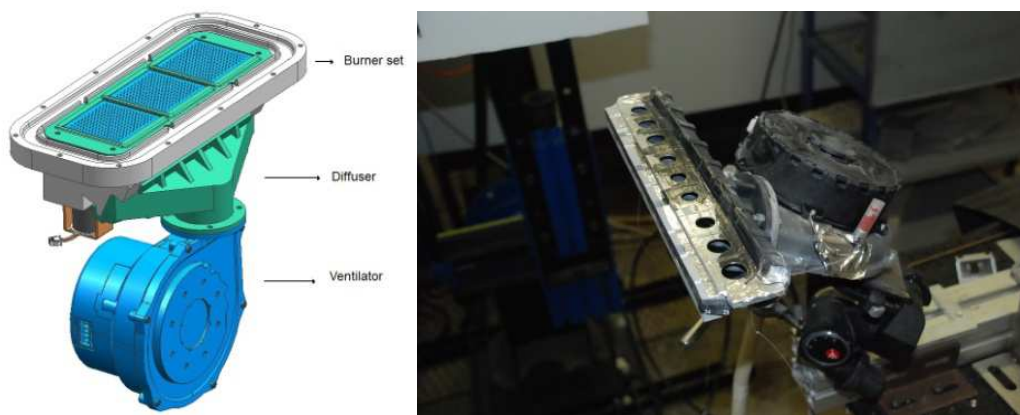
Bosch's pressurized burner system drawing (left) and ventilator and diffuser assembly (right).
